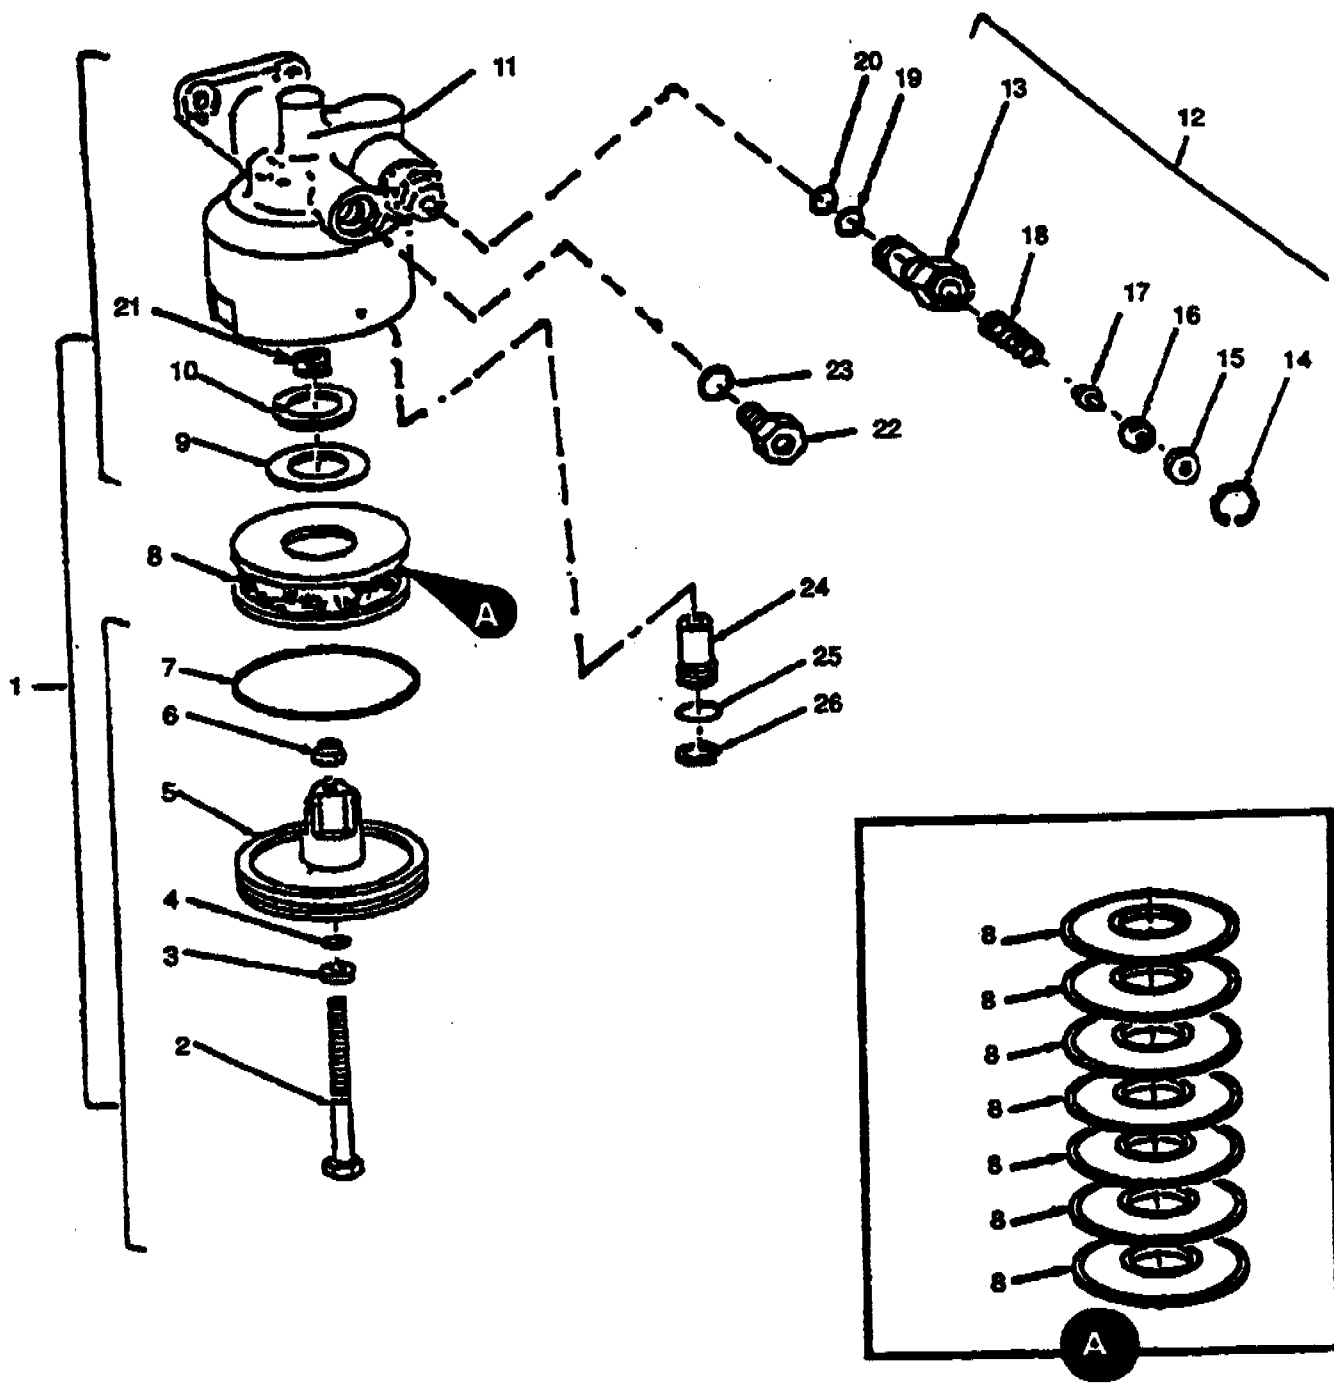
Lube Oil Filter Assembly, P/N 1-080-460-02.
